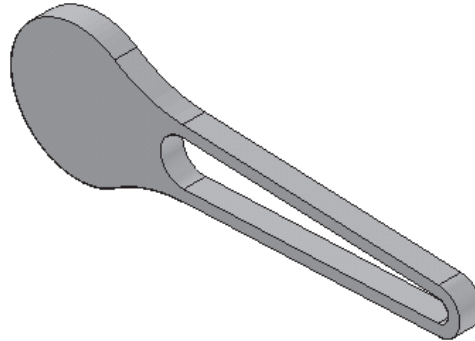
Resulting cutout created by removing the material inside the sketch
